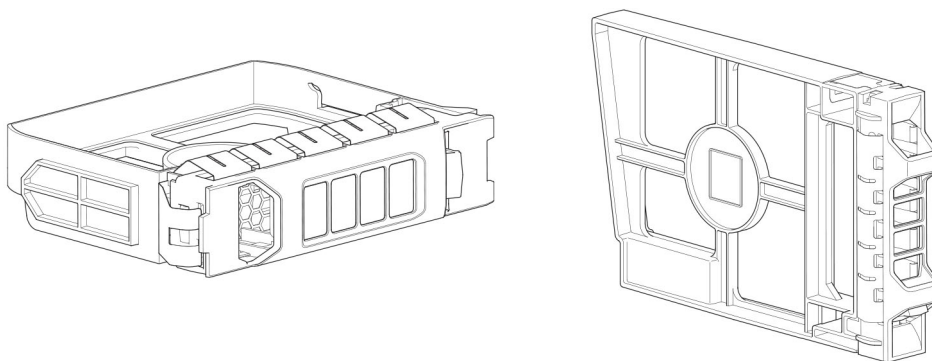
Blank drive carrier modules: 3.5 in. drive slot (left); 2.5 in. drive slot (right)
